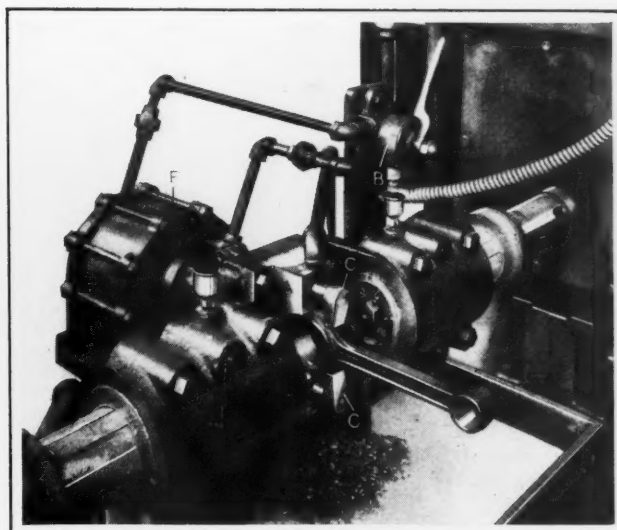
Facing and Chamfering Both Sides of Connecting-rods and their Caps
